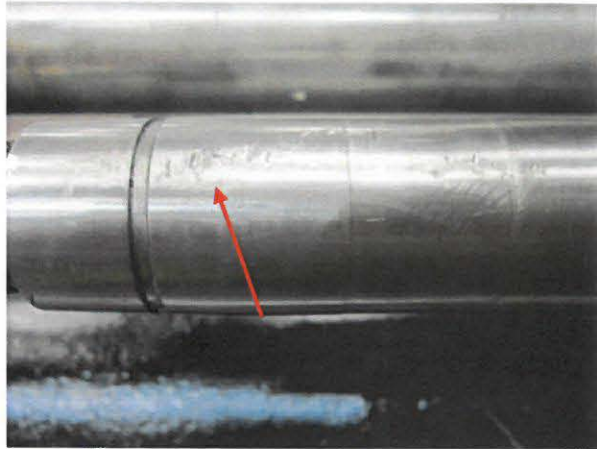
Shaft Gall At Thrust Collar Nut Fit
